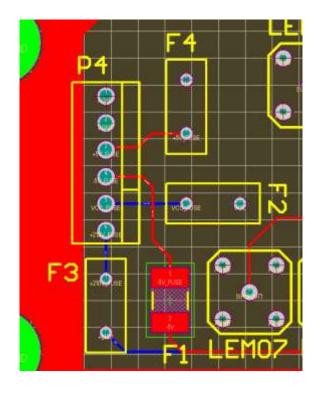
Close-Up CAD Drawing of Backplane Showing the Power Supply Fuses. F1=-5V, F2=VCC, F3=+210V, F4=+5V
